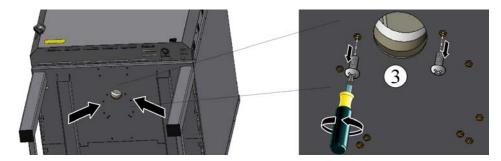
Undo the screws of the air inlet flap (similar to picture)
